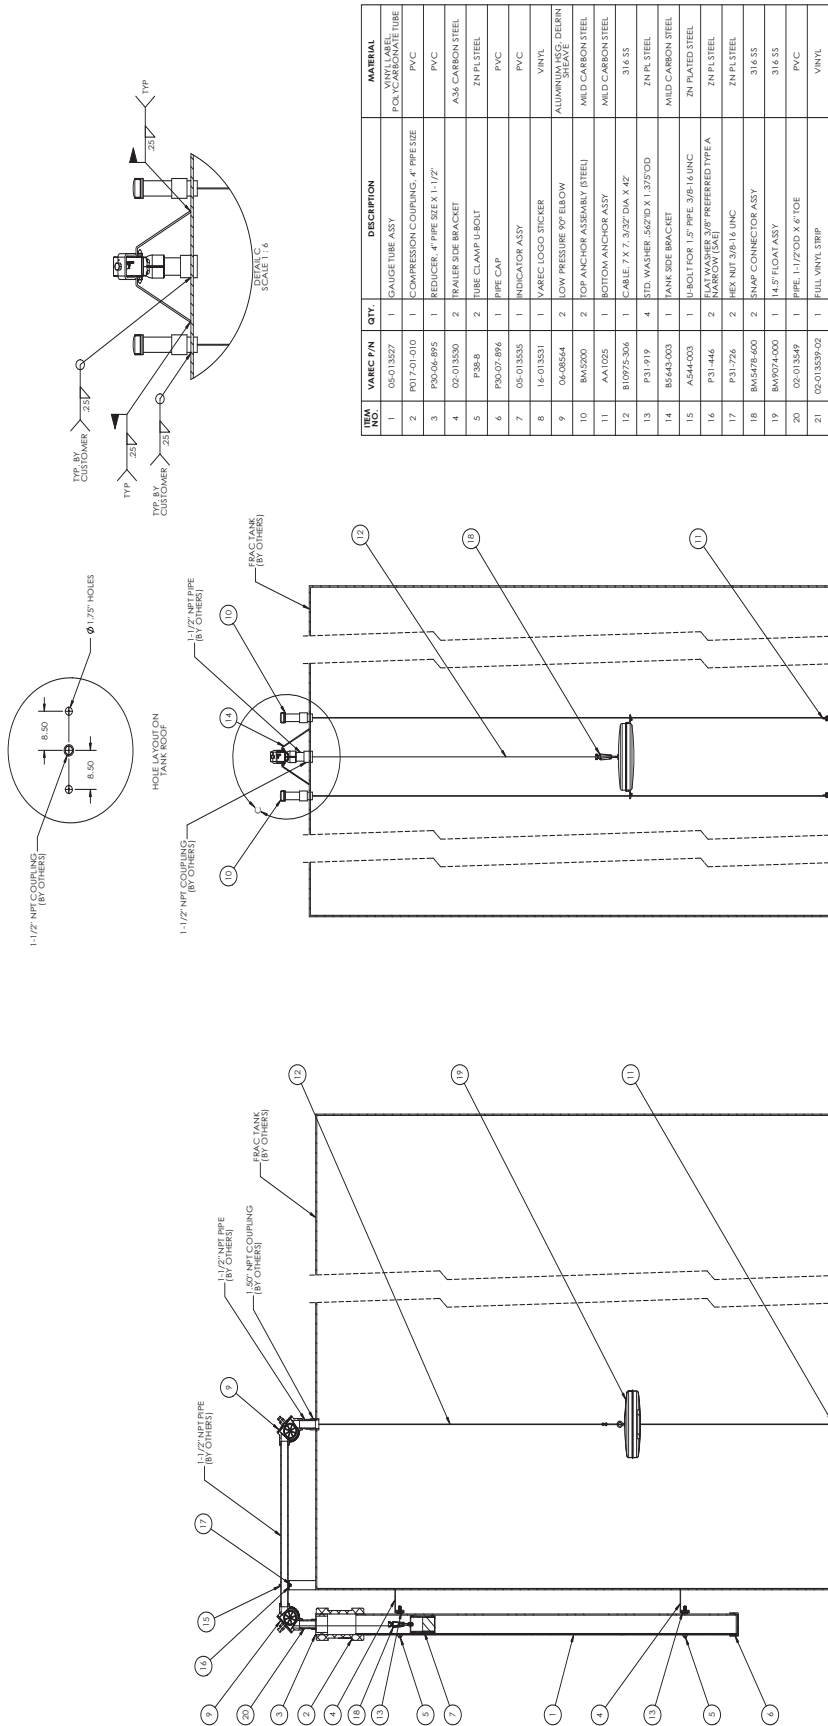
Tube Style Level Gauge for Mobile Tank Top Assembly w/ Component List
